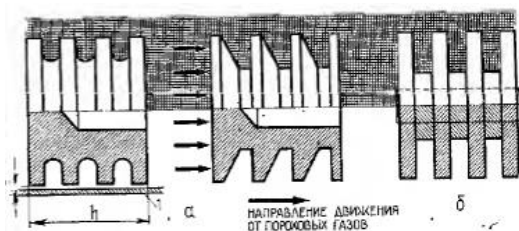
Shapes of labyrinth seal combs: a - turned from wood; b - assembled from cardboard; 1 - model body parachute is sewn on. The discs have some freedom of movement in parallel planes, which compensates for assembly inaccuracies.
